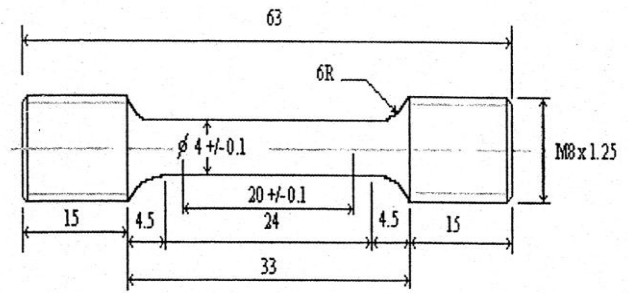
An ASTM-E8M round tensile specimen drawing (all dimensions are in millimetres)[13]
